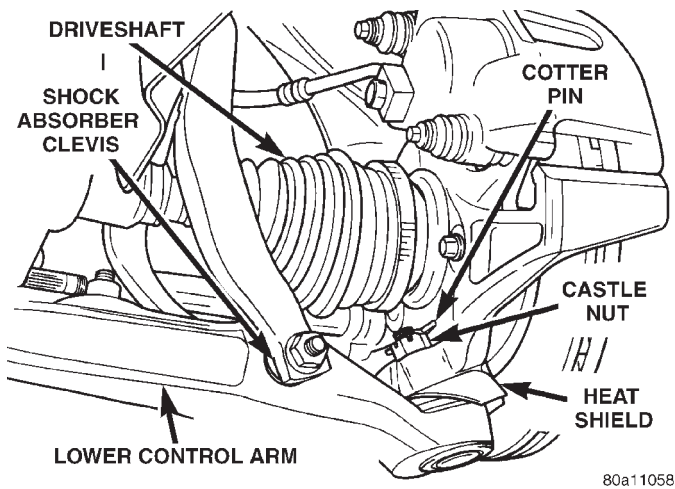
Lower Ball Joint Attachment To Steering Knuckle
